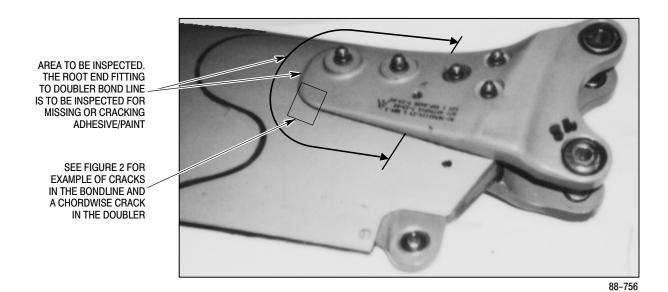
Main Rotor Blade Lower Surface Root Fitting and Doubler Inspection.
